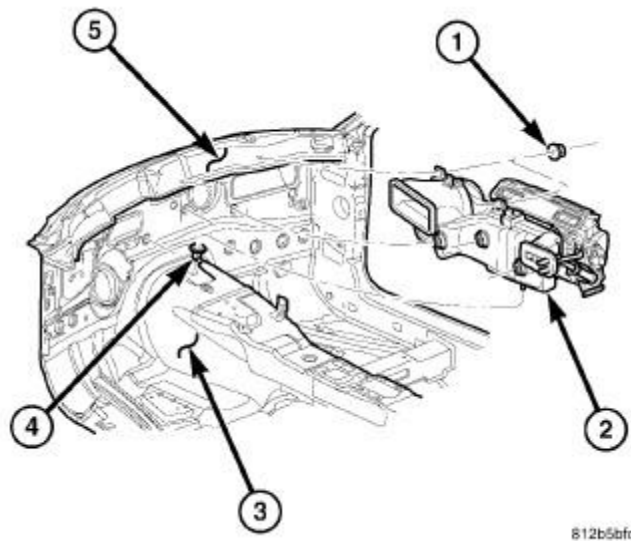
HVAC Housing, Dash Panel, Nuts, Grommet & Floor Panel
